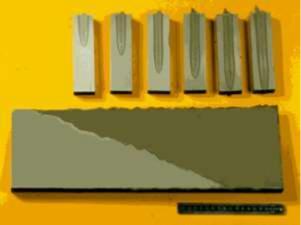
The longitudinal and transverse macrosections of the weld closen region in electron beam welding of 150 mm thick steel.
